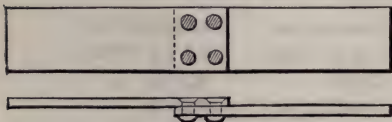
Double-riveted joint, countersunk and snap-headed.
